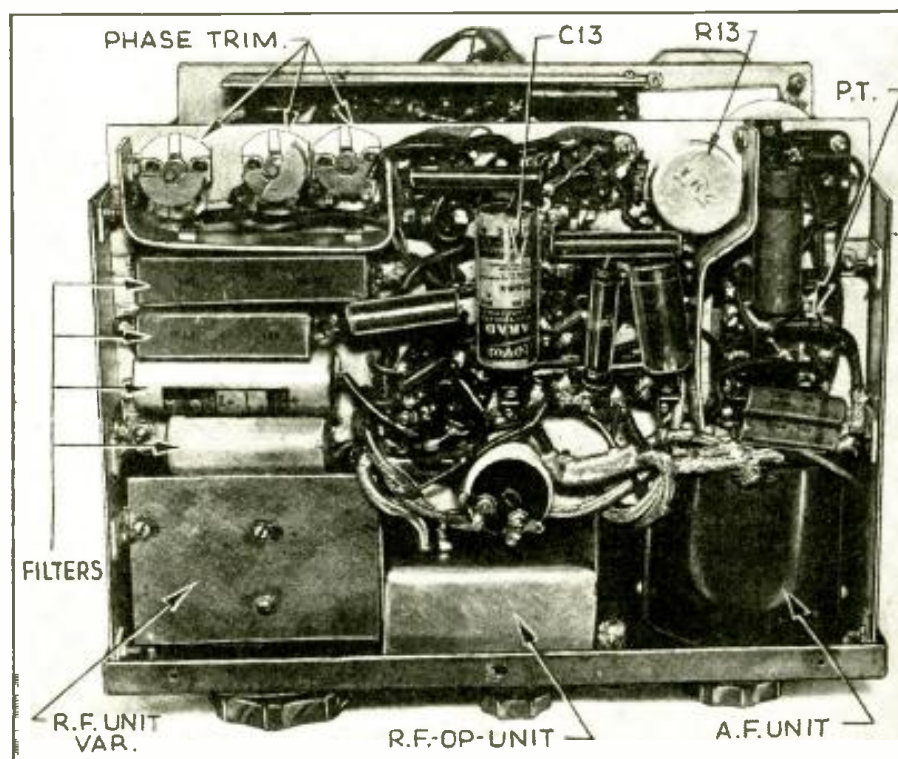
Fig. D. Bottom view of the Super-Geno section. Compactness is the keyword, deft soldering the key! Use only the parts recommended in the List of Parts.
